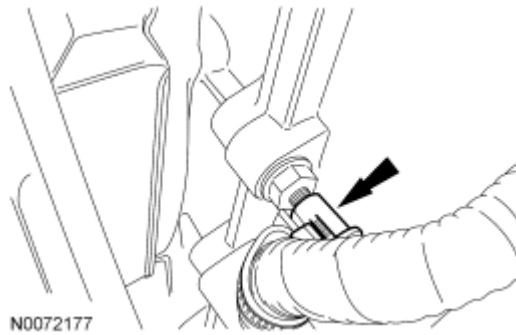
Identifying Transaxle Control Wire Harness Retainer
